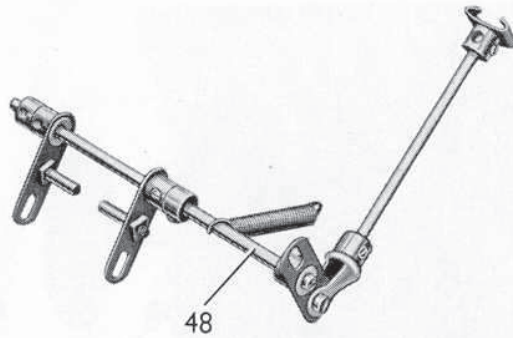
The clutch pedal and release lever unit removed from the chassis
